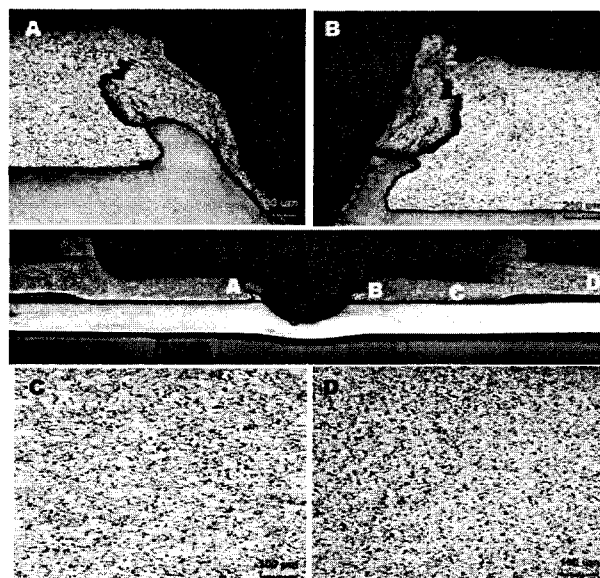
Macro and microstructure of dissimilar FSJ upper plate: Al6061-T6, bottom plate: galvanized steel,
